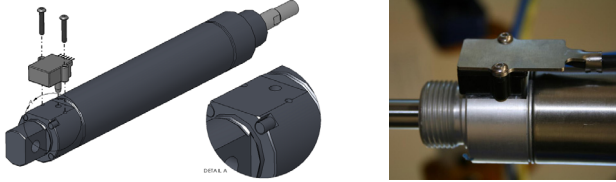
(left) CAD exploded view of the assembly of the post-processed cylinder and the pressure sensor. (right) Actual view of the finished assembly.
